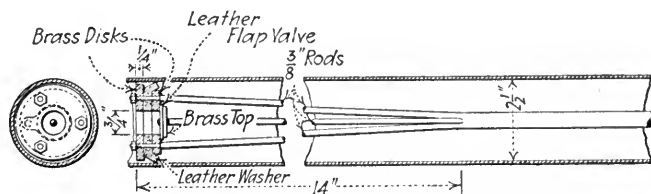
SIMPLE HAND PUMP FOR $2\frac{1}{2}$ -IN. PIPE.
